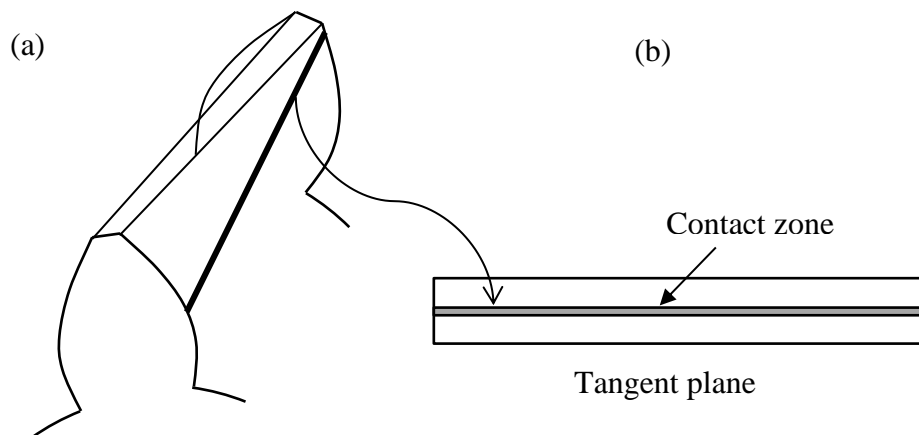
Contact of helical gears; (a) contact line on a helical gear tooth and (b) contact zone where its length is much bigger than the width
